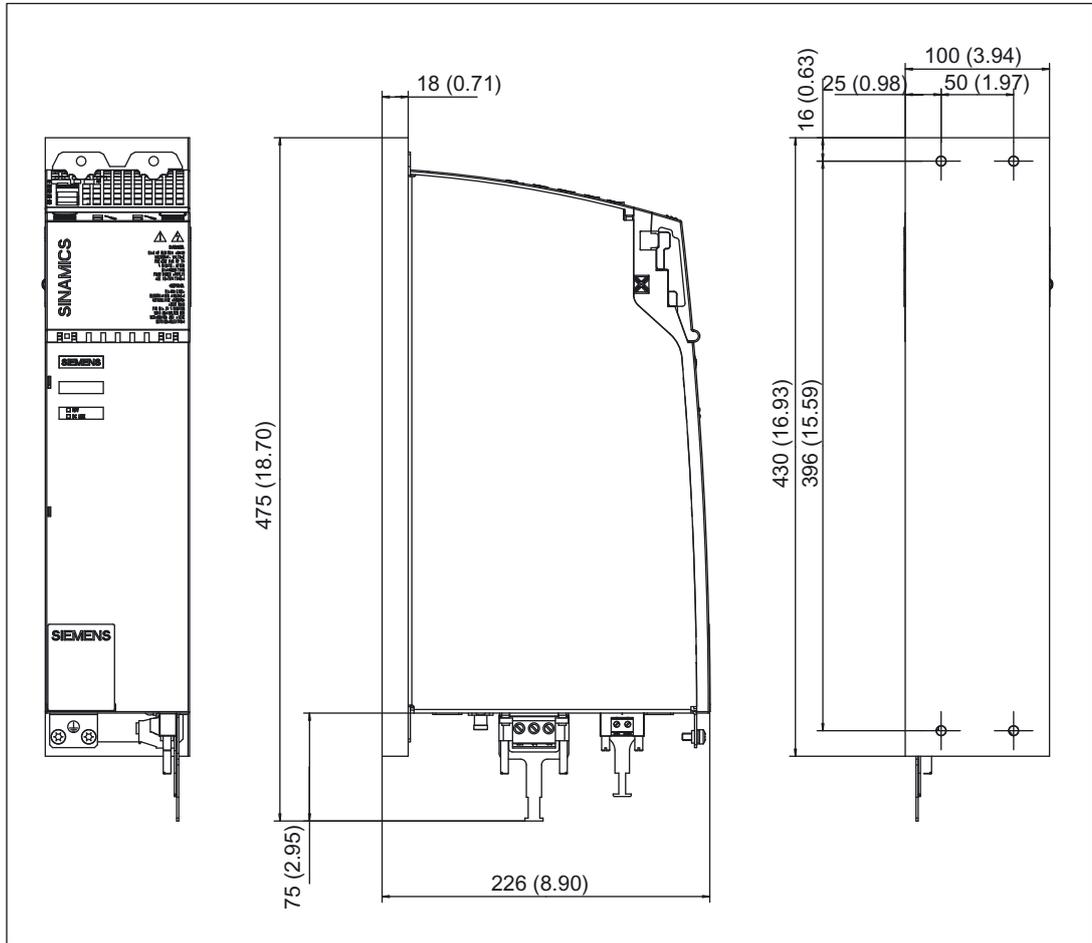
Dimension drawing: Basic Line Module with cold plate 20 kW
